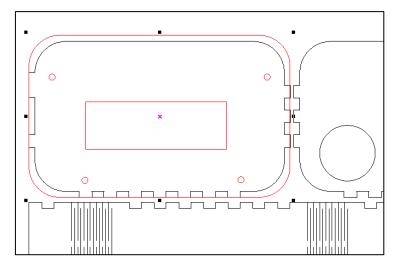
Sketch in RED is Bottom Face Plate Sketch
